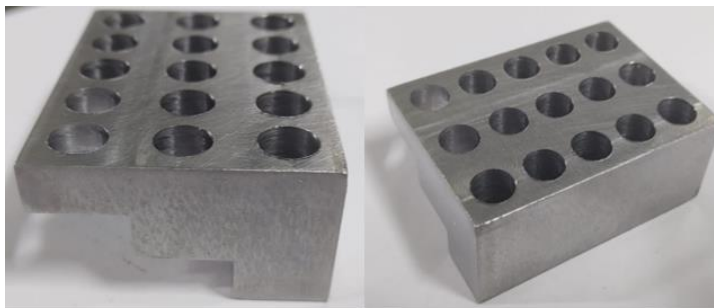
Hole exit images of drilled holes without tool runout after maintenance
